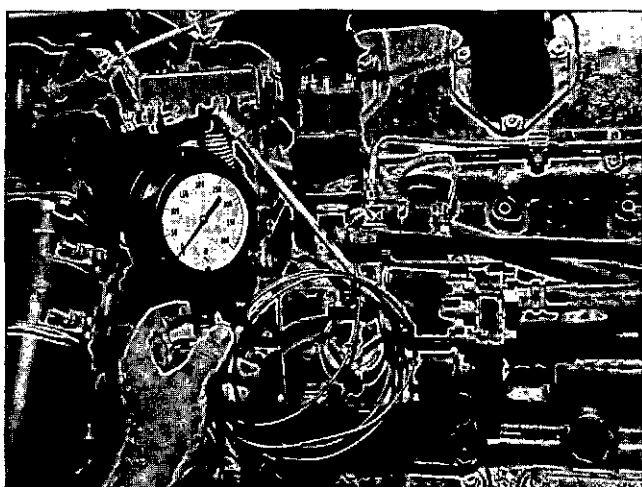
, F5203. Checking fuel manifold pressure with ST-435
